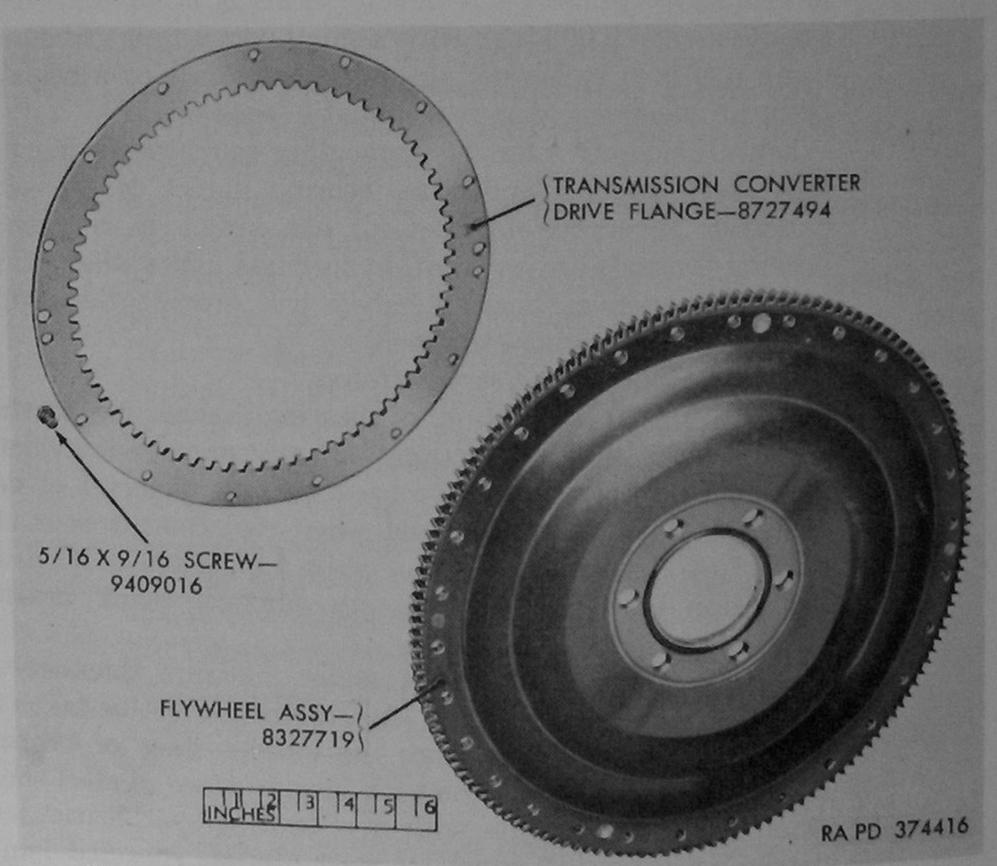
Engine flywheel and drive flange—engine assembly 8726920.
